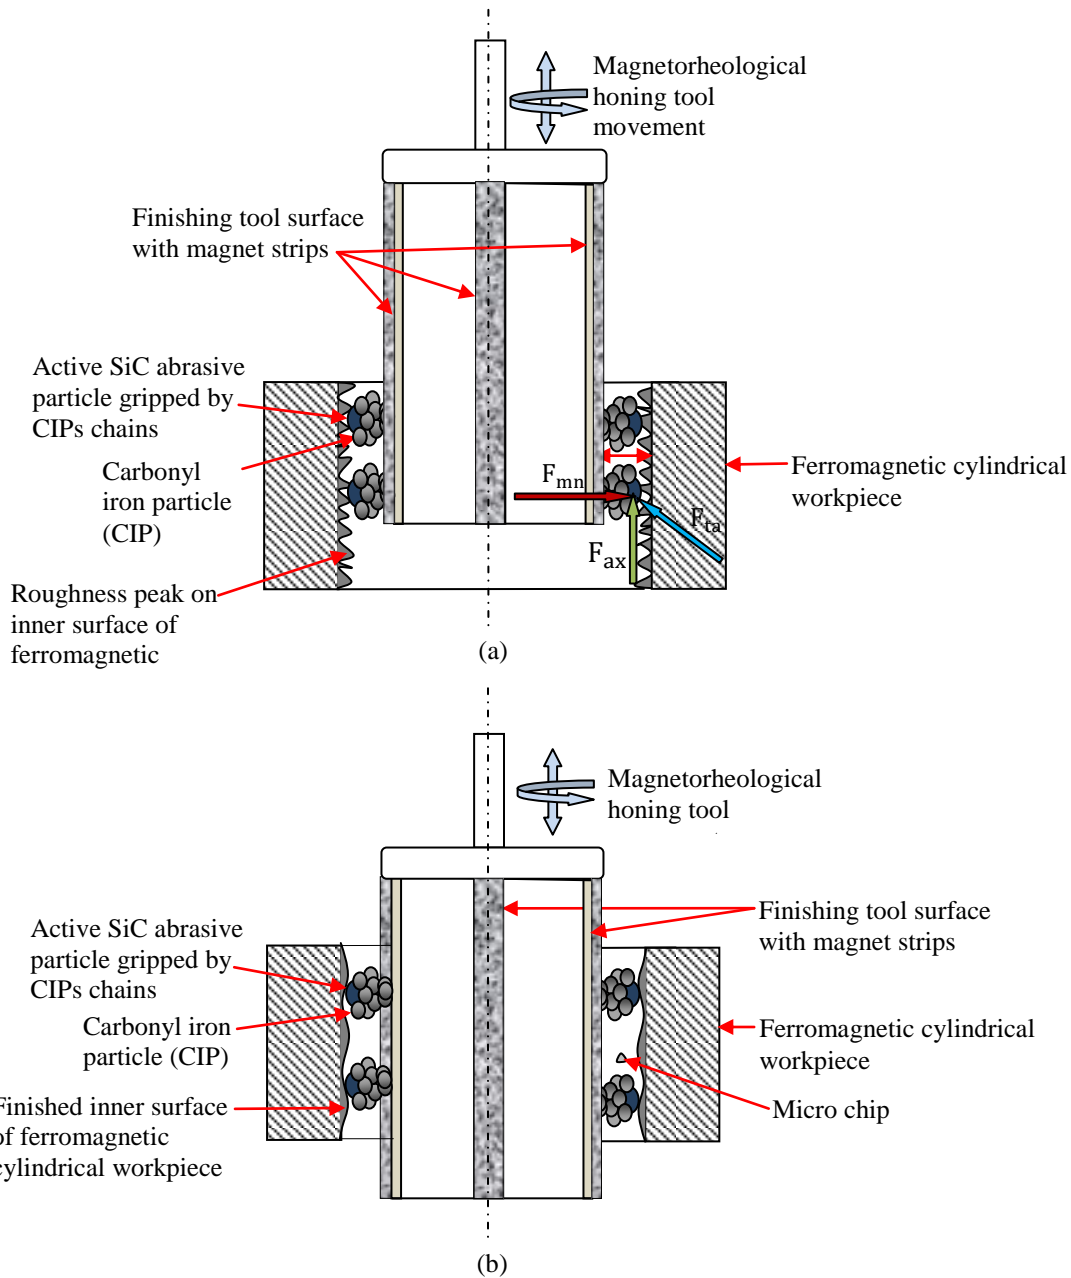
Schematic of (a) active abrasives gripped by CIPs (carbonyl iron particles) chains removing roughness peaks of the internal surface of the ferromagnetic cylindrical workpiece and (b) updated roughness of cylindrical workpiece surface after removal of roughness peaks.
